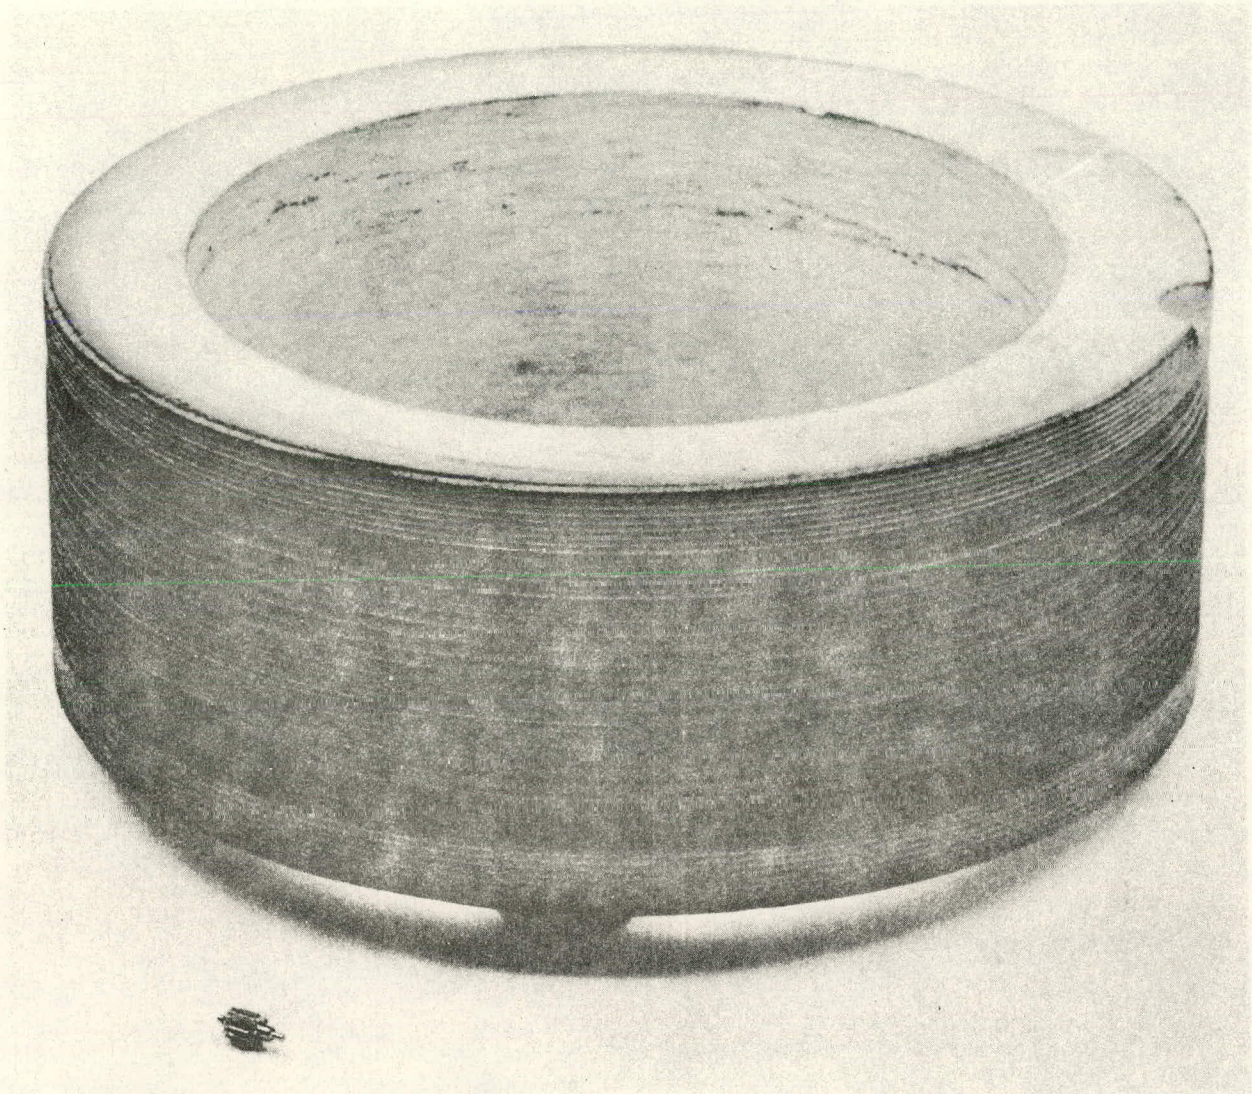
Photograph of Diamond Dresser and Grinding Wheel
